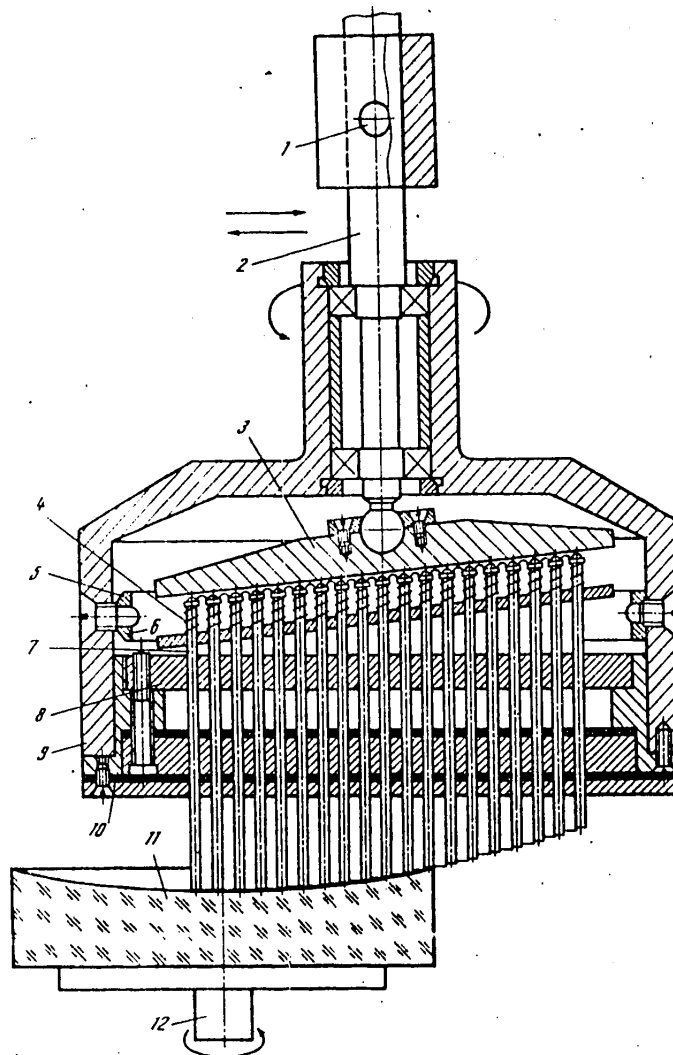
Diagram of a machine tool for machining aspherical surfaces.
